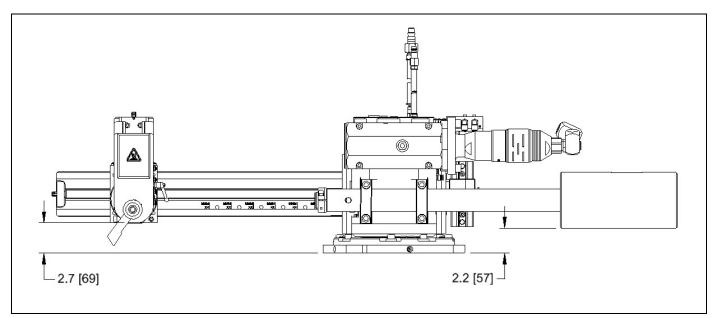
SURFACE MOUNT ASSEMBLY DIMENSIONS
